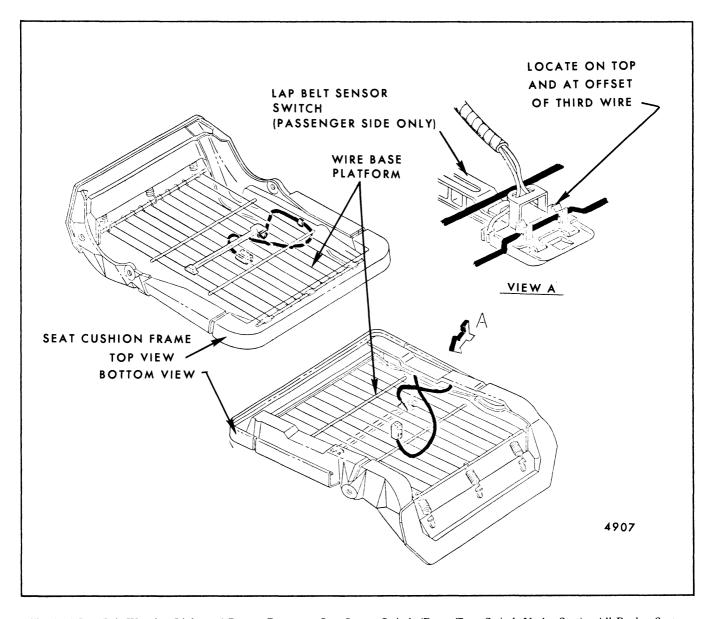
Lap Belt Warning Light and Buzzer Passenger Seat Sensor Switch (Beam Type Switch Under Seat) - All Bucket Seats
